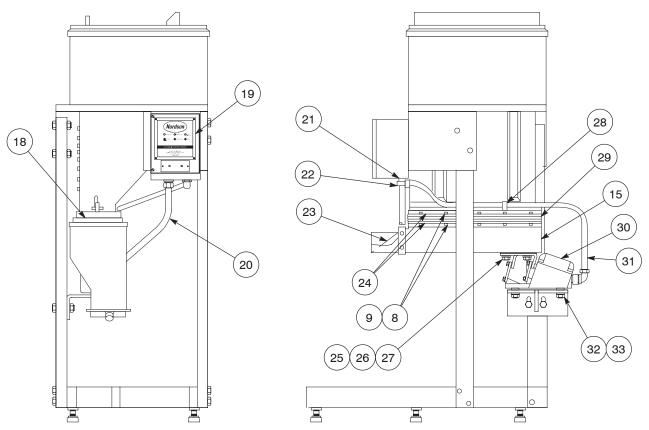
Hopper/feeder assembly parts (front and side view)
